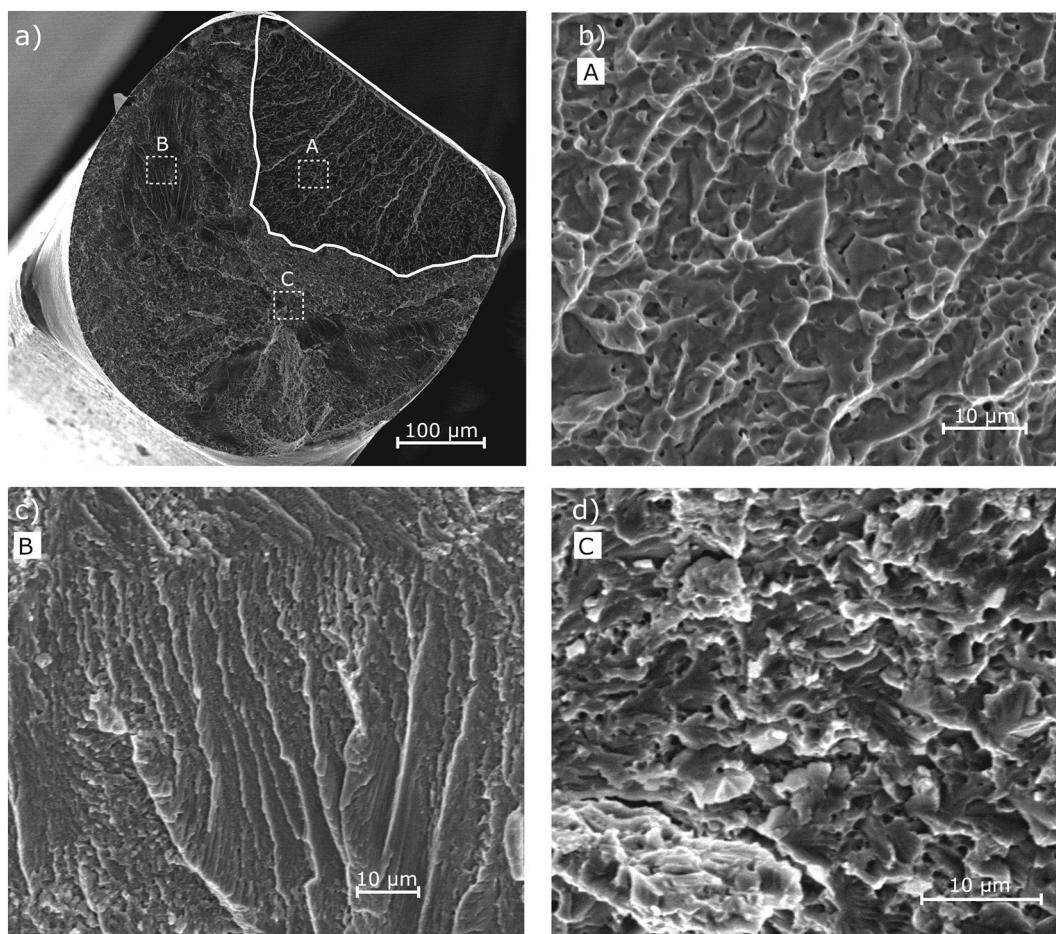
Fracture surface on the NiTi side: a) overview; b) ductile-like fracture; c) cleavage fracture; d) quasi-cleavage fracture.
